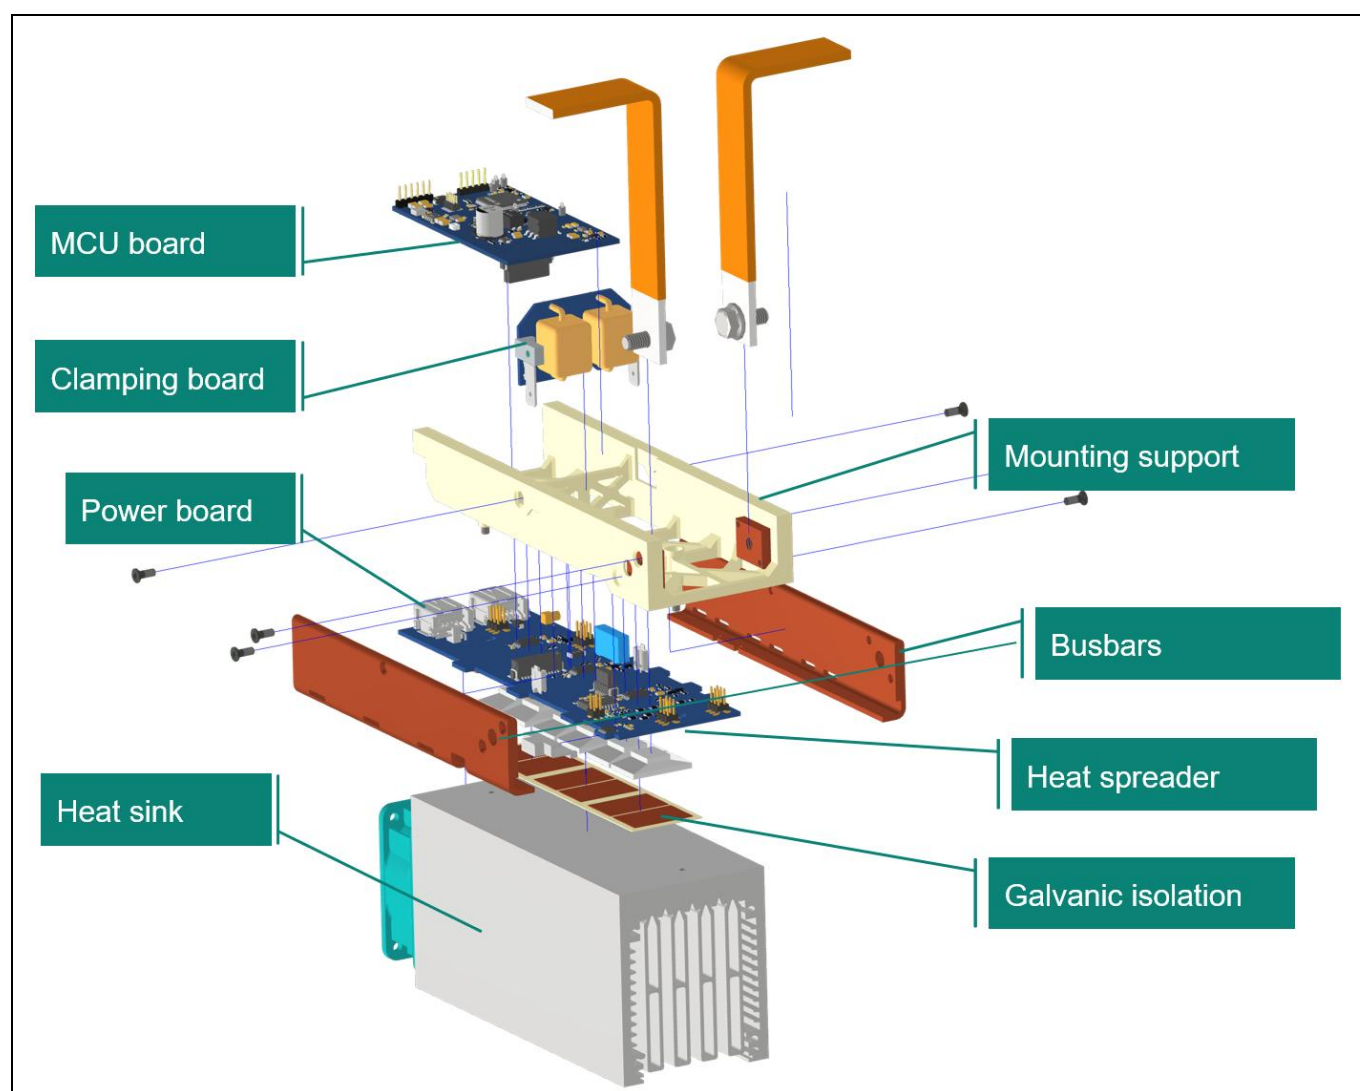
Full assembly (exploded view) of the eBDU demonstrator
